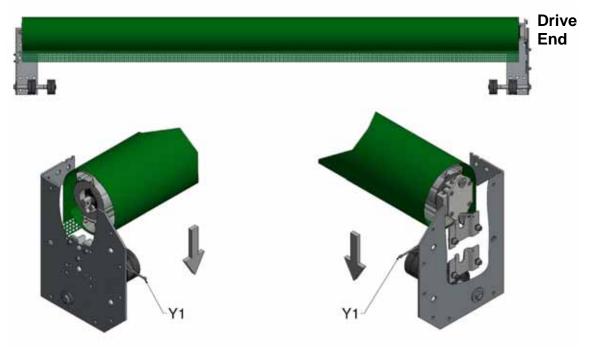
, Locating Top Tube in Brackets (RH Drive Shown)
